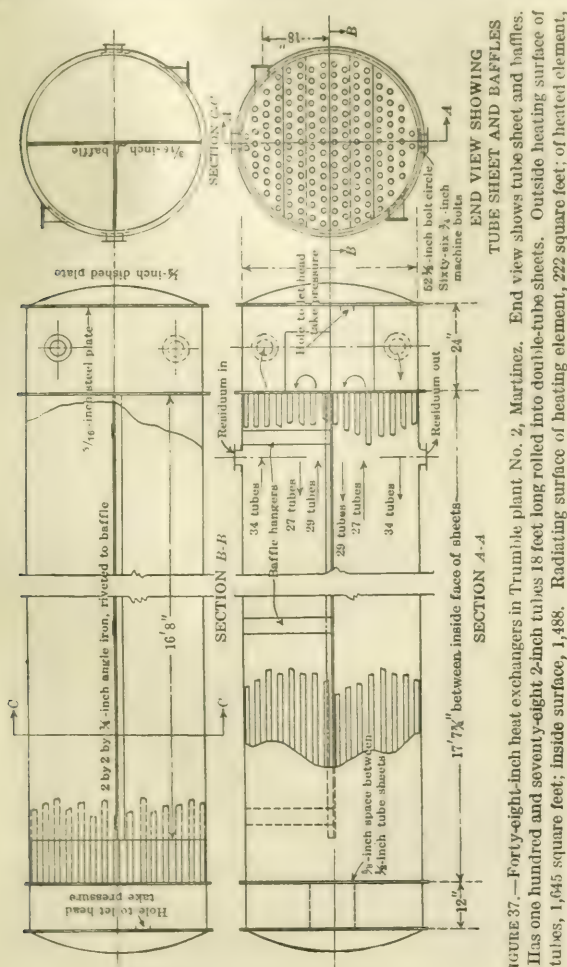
Forty-eight-inch heat exchangers in Trumble plant No. 2, Martinez. End view shows tube sheet and baffles. Has one hundred and seventy-eight 2-inch tubes 18 feet long rolled into double-tube sheets. Outside heating surface of tubes, 1,645 square feet; inside surface, 1,488. Radiating surface of heating element, 222 square feet; of heated element, 65 square feet.
